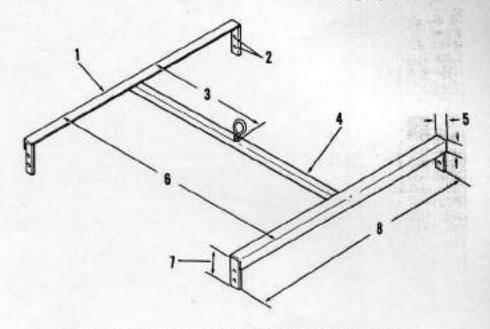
Cab removal bracket to be fabricated locally to dimensions shown.
